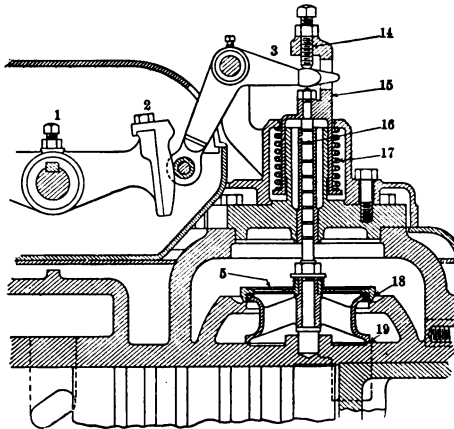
ADMISSION VALVE AND GEAR, SKINNER UNIFLOW ENGINE
